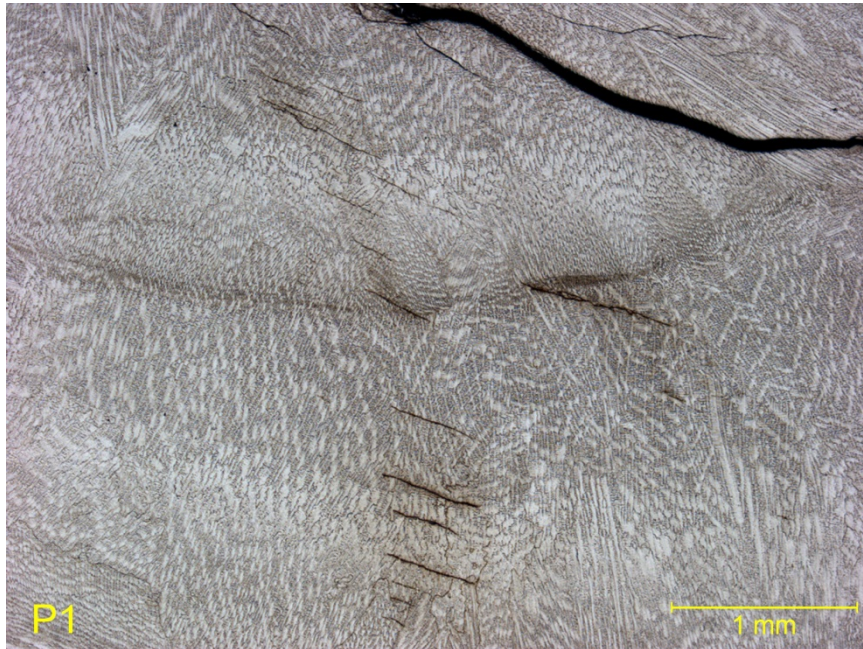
Slag Inclusion and Existing Base Material Crack
